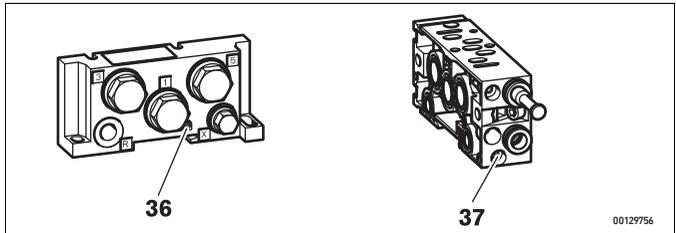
MS01-PA, holes for fastening to a DIN rail
